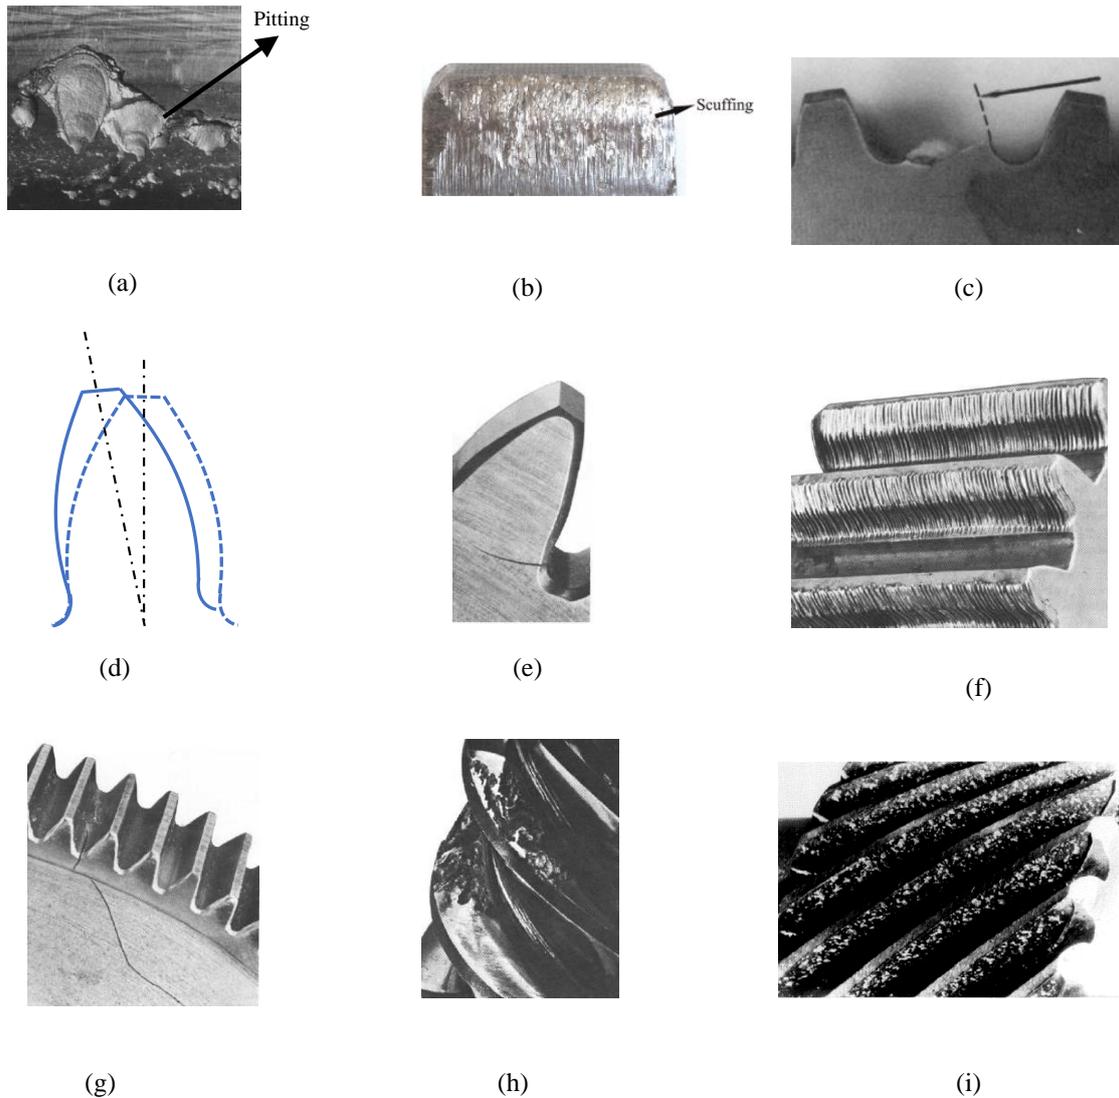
(a) Pitting failure[67], (b) scuffing failure [72], (c) missing tooth [67], (d) tooth bending failure, (e) tooth crack failure, (f) abrasive wear failure, (g) rim or web failure, (h) spalling failure (e- h [73]), and (i) corrosion wear [4]
